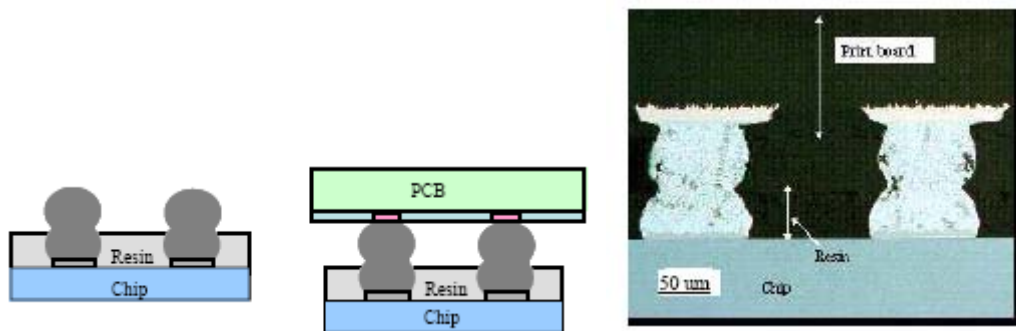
Cross-section of the solder joint after assembly on board [66]
